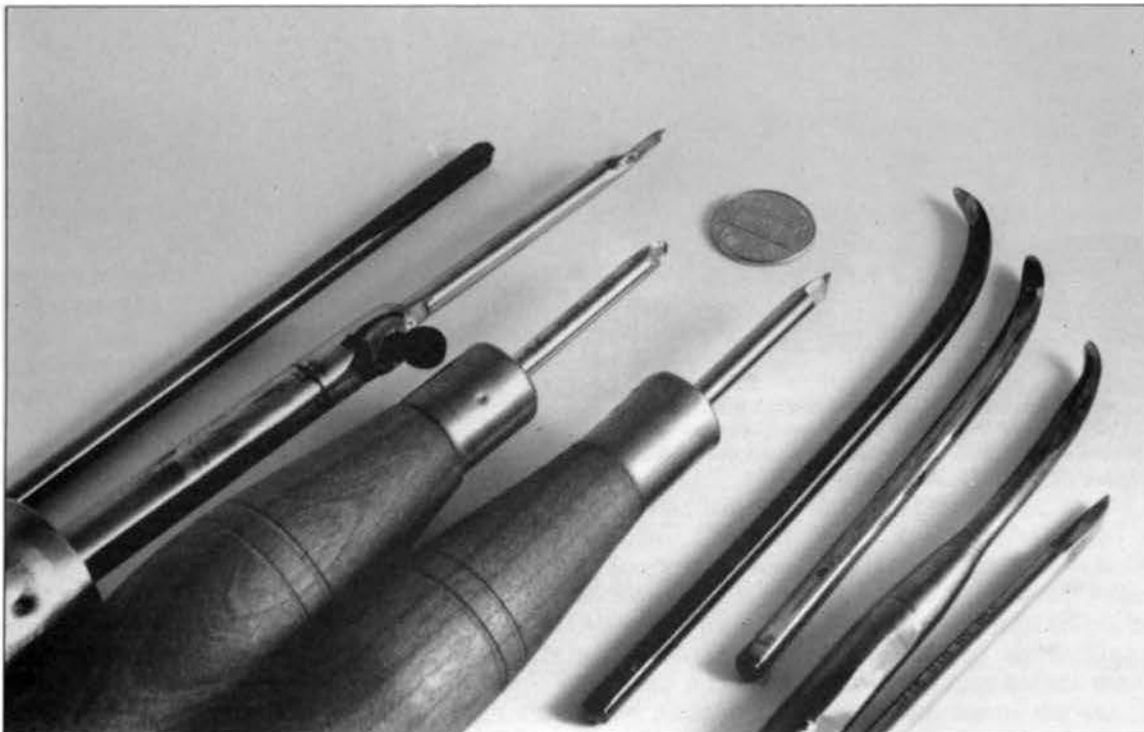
l. to r., small deep-fluted gouge made from 3/16" drill rod; 1/32" parting tool in holder made from 3/16" drill blank; 3/16" round scraper, made from 3/16" drill blank; pointed scraper made from 3/16" drill blank; three curved tools to hollow out vessels, made from drill rod; round-sided scraper, made from 3/16" drill blank
